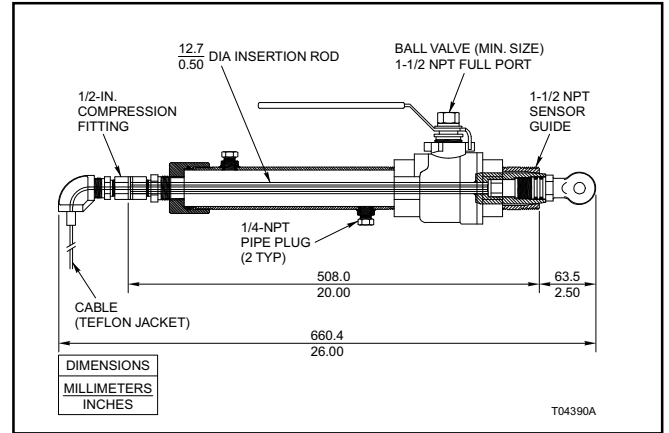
High Pressure Ball Valve Insertion Sensor Assembly
